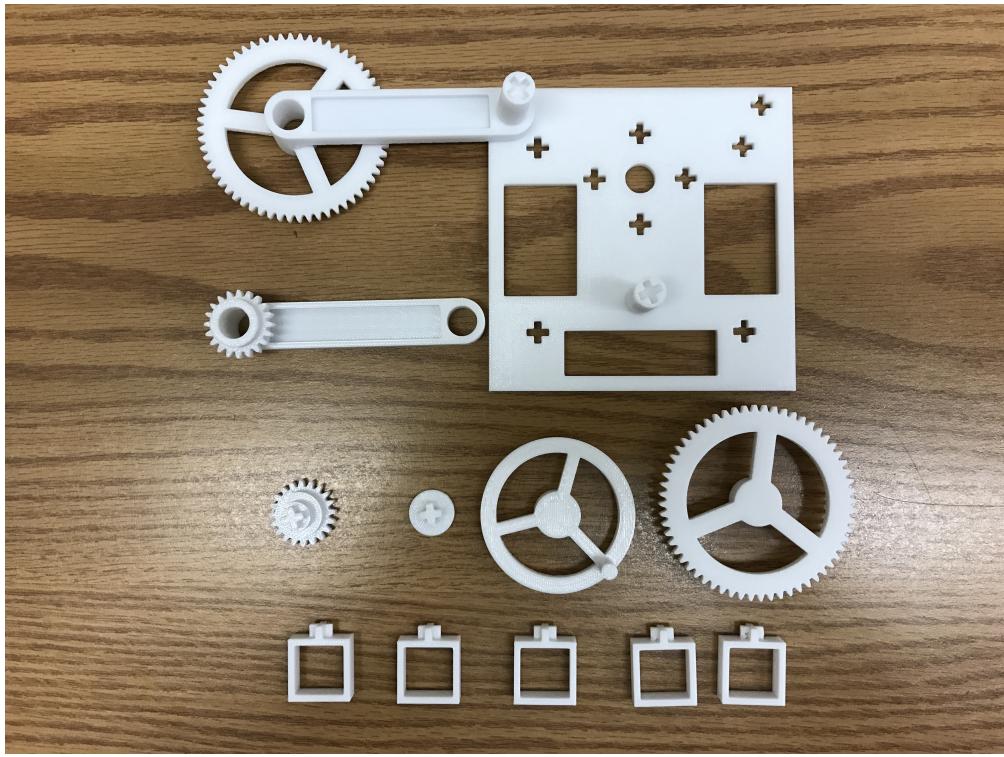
A photograph of the component parts of the Trifolium drawing mechanism that were manufactured from ABS using additive manufacture.
